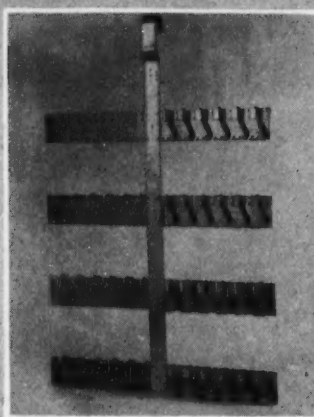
D-4—This fixture is 5' 0" in overall length and 3' 0" in overall width; has 48 openings and may be used for metal stampings and similar parts. For long narrow slabs two (2) fixtures are used together. Fixtures of this type may be obtained with two (2) or more arms, depending on the width of parts to be racks. On the four (4) arm fixture shown, the distance between the arms is 8 1/2" and the top arm is 14" below the top of the rack. The slots are 1/4" wide and 3 1/4" deep.
